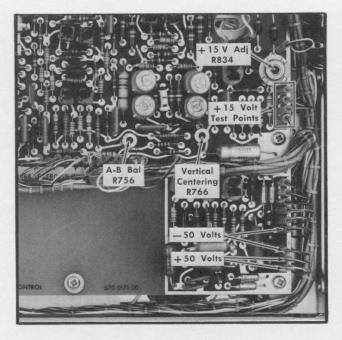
Power supply test points and adjustment locations on right rear of Type 352.
